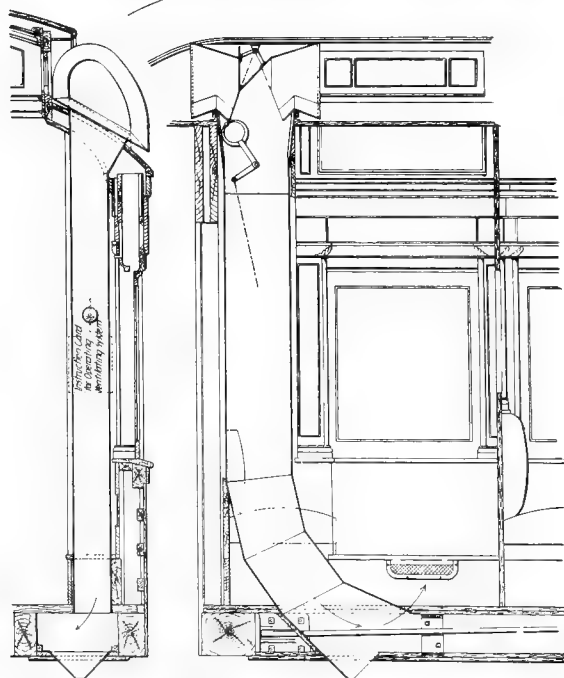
Pennsylvania Railroad Ventilating Apparatus for Passenger Train Cars.
